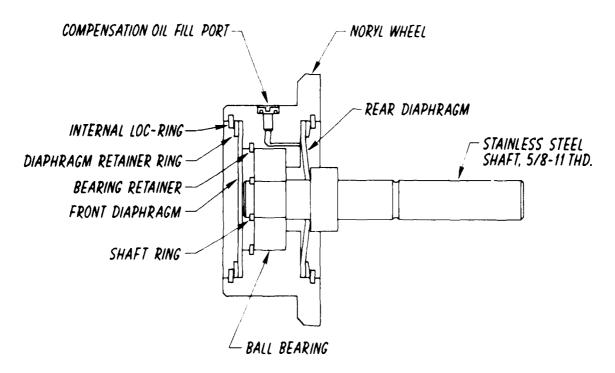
Cross-sectional Drawing of a Carousel Trolley Wheel
